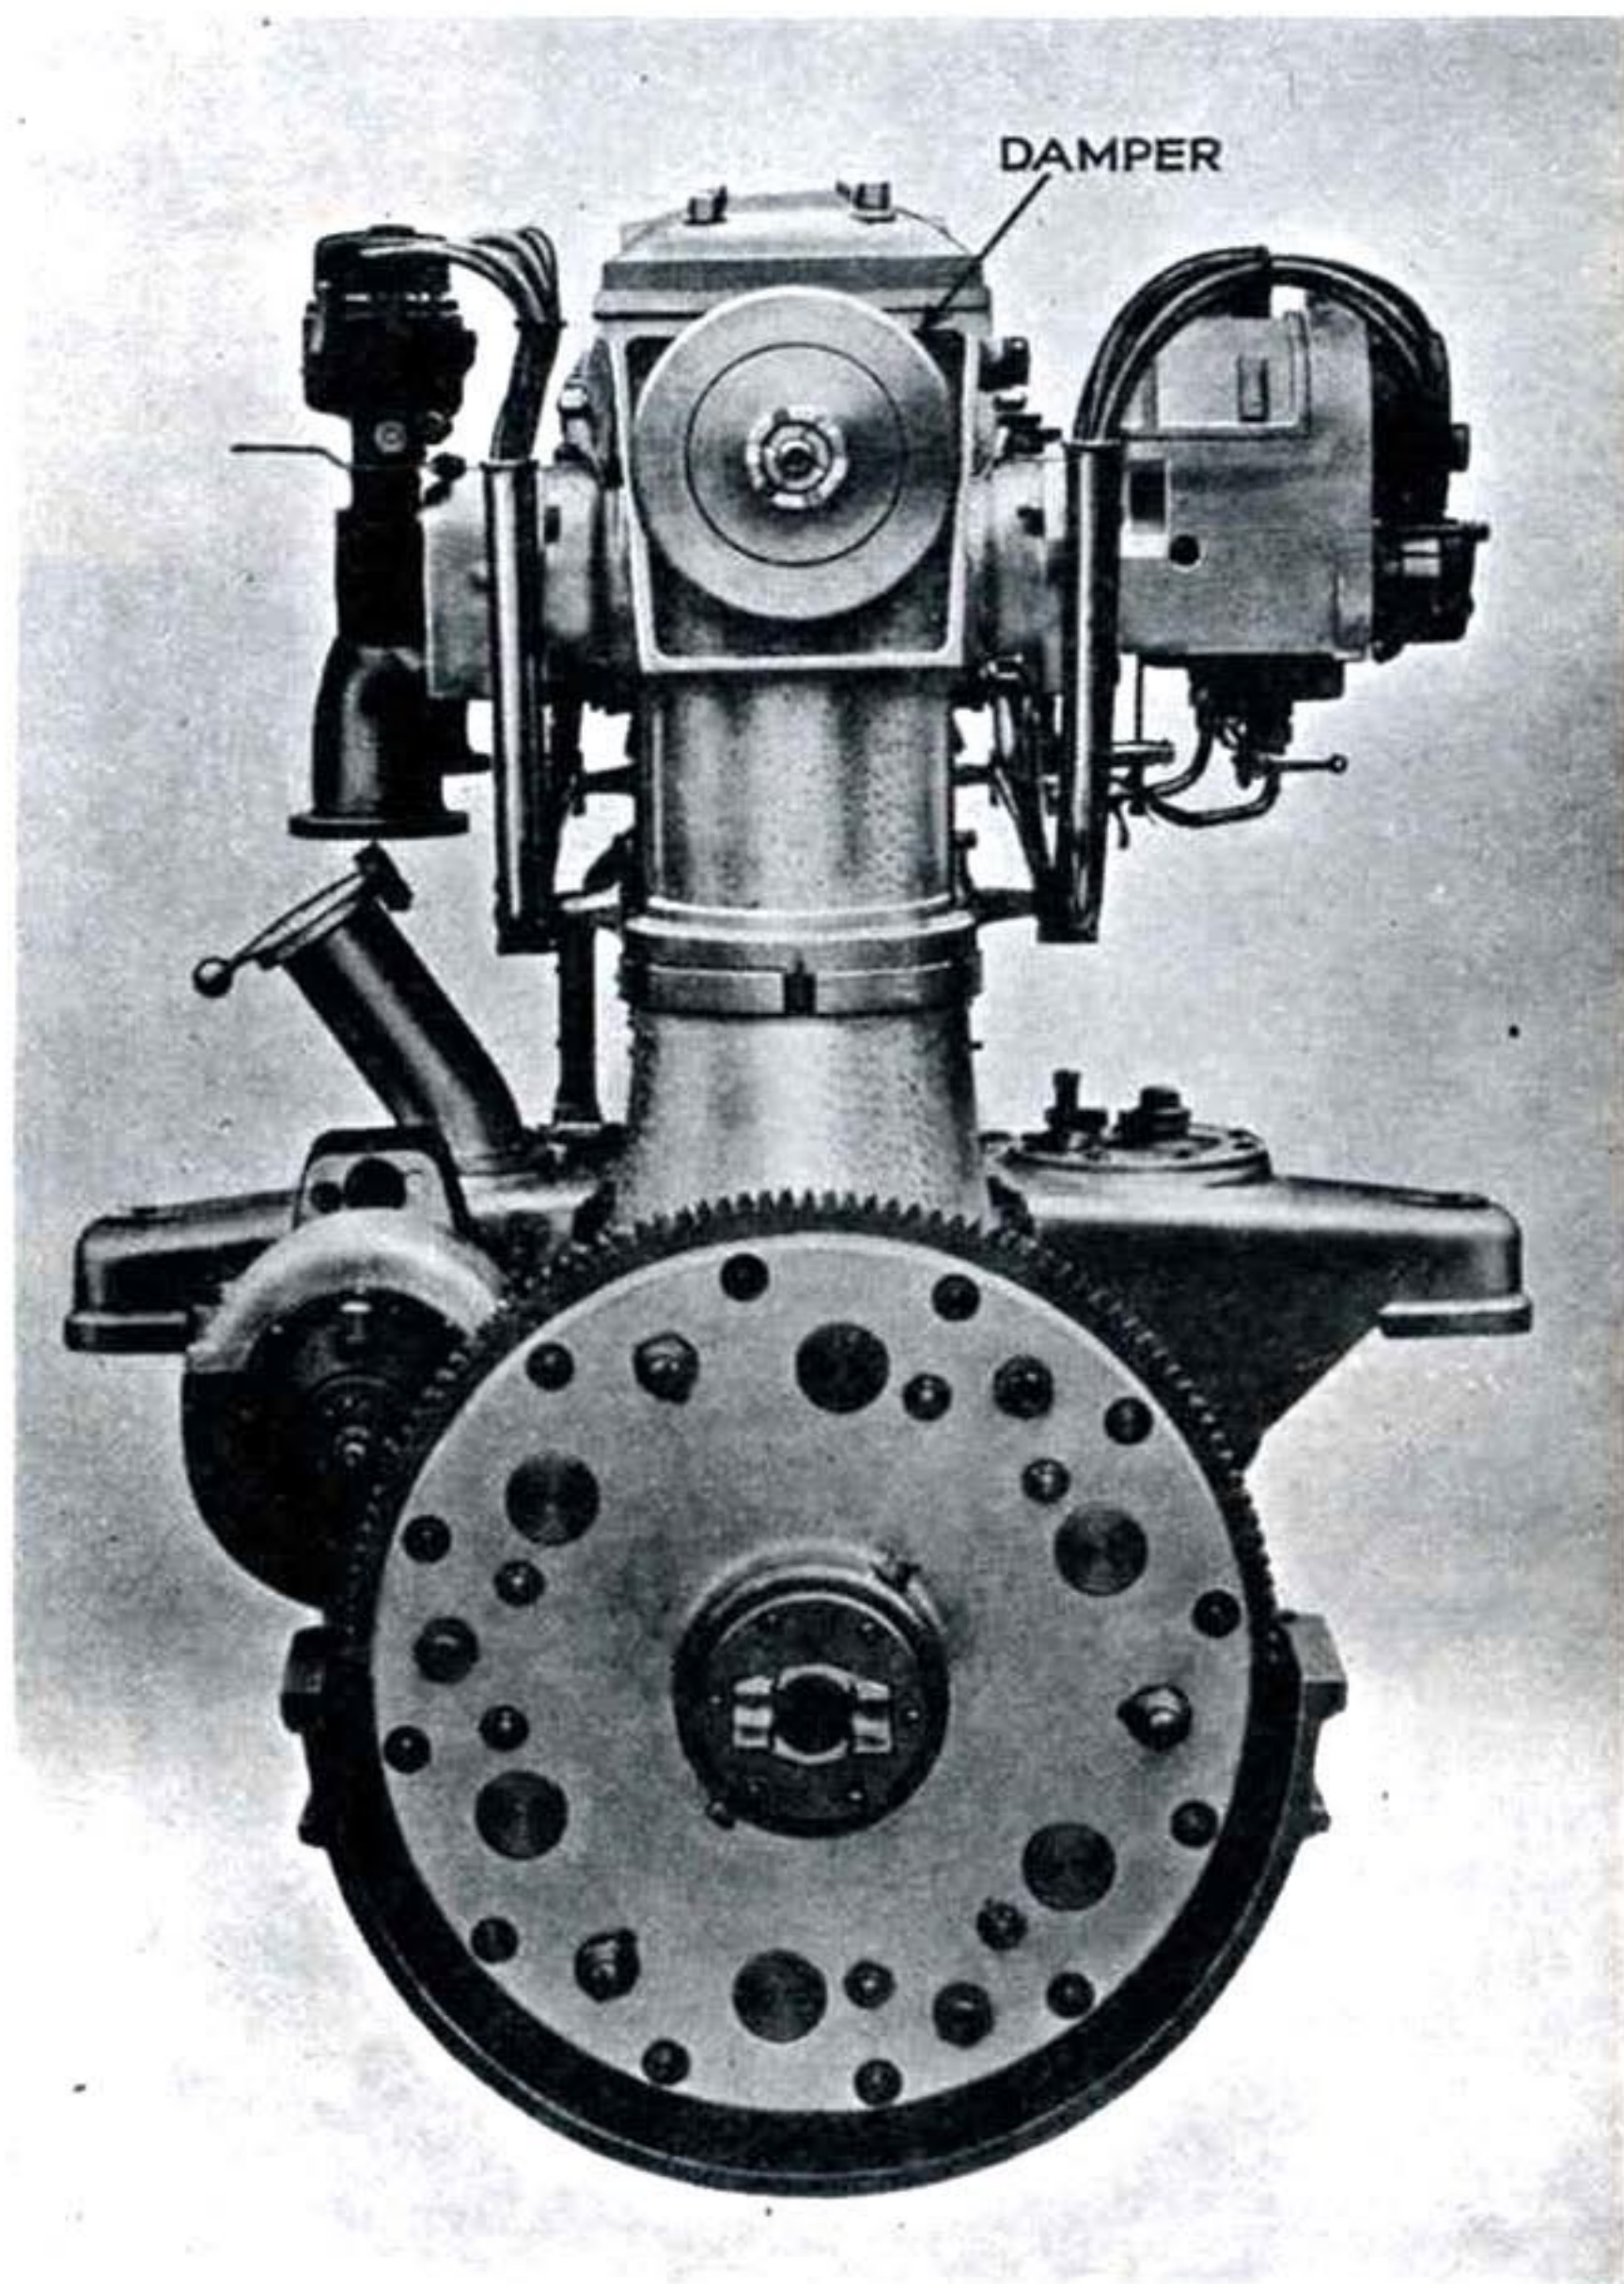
REAR VIEW OF ENGINE AND CLUTCH.
